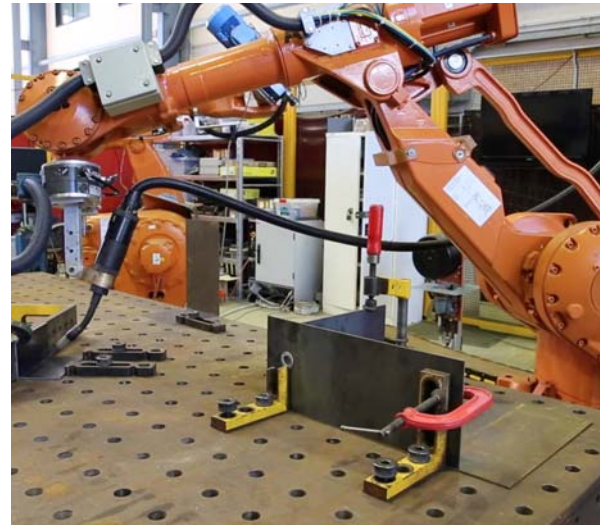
Robot welding plates using paths planned with TSMPD
